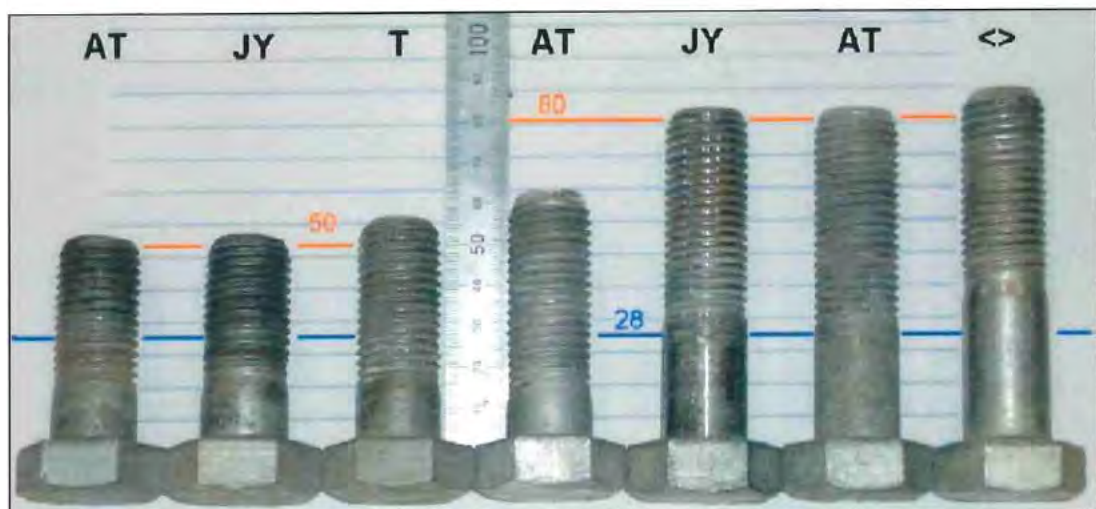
Examples of the bolt types used in testing (Wheeler 2004).
